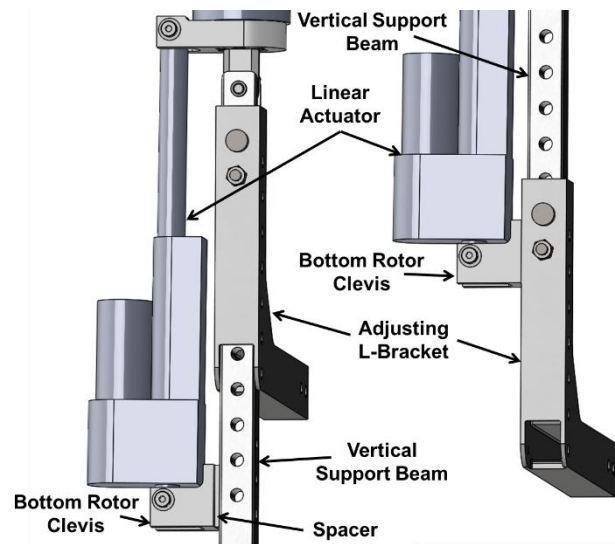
Close up, side view of bottom of rotor assembly in short (left) and tall (right) configurations.
